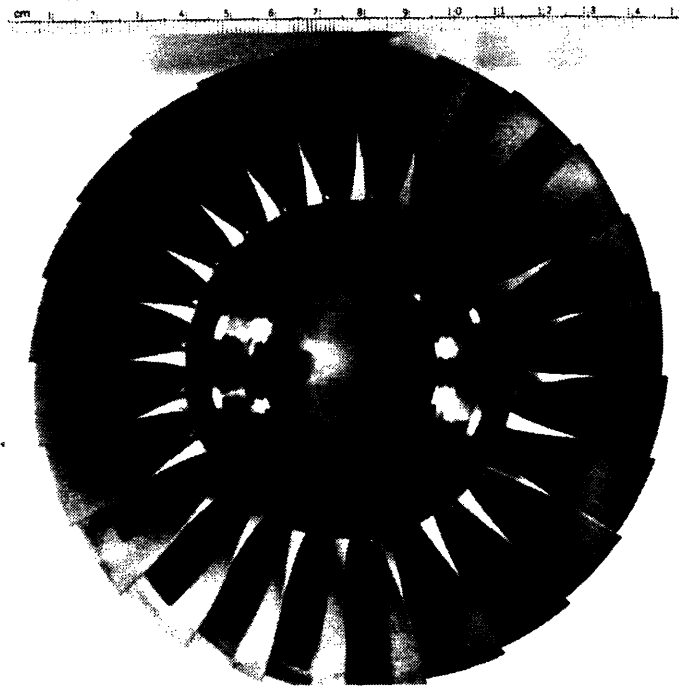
LTS 101-750B-2 Axial Compressor Rotor
